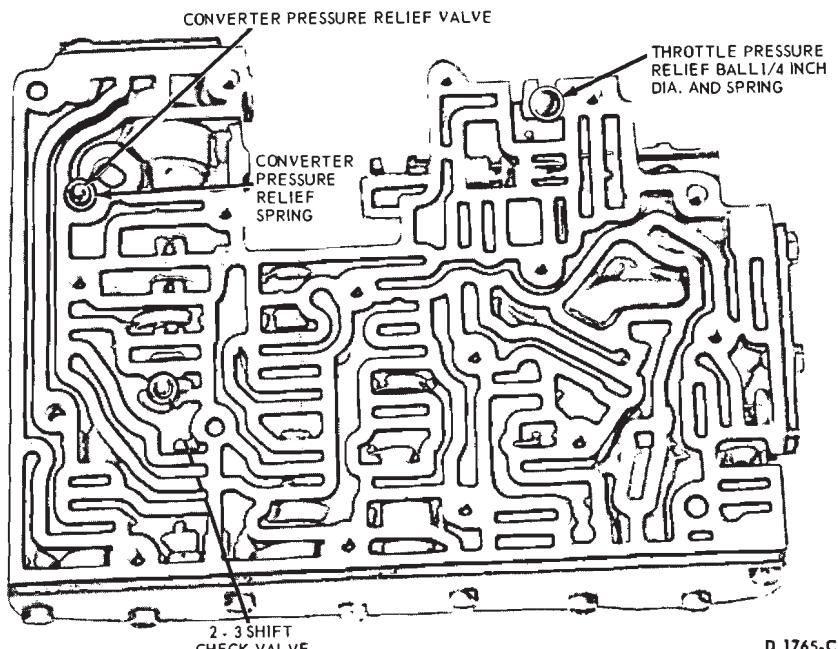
Converter Pressure Relief Valve, Throttle Pressure Relief Valve, and 2-3 Shift Check Valve Locations
